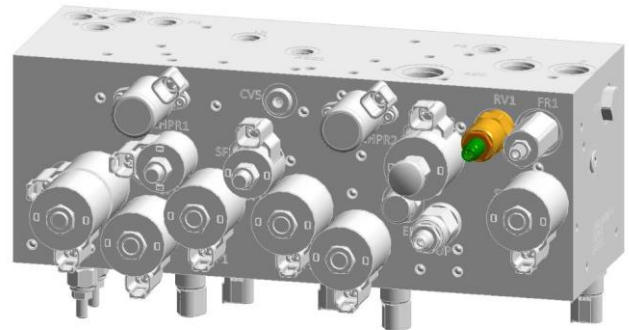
Reel Drive Relief Valve on Header Manifold
